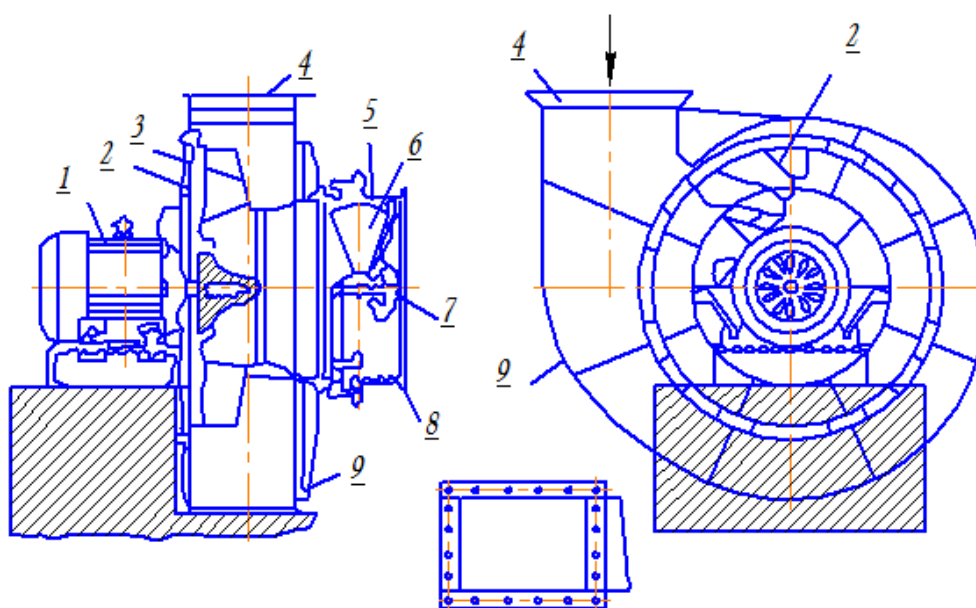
Smoke pump: 1-electric motor; 2-working blades;
